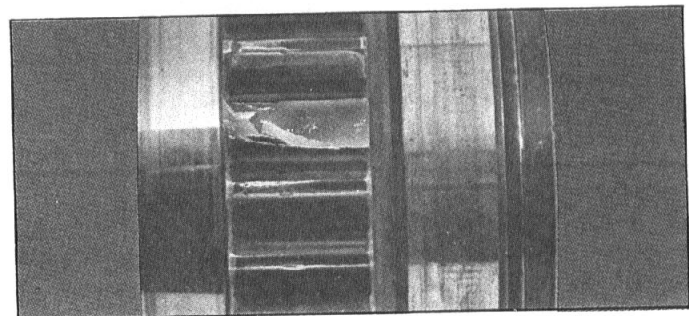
Fatigue fracture identified by "beach" marks.
